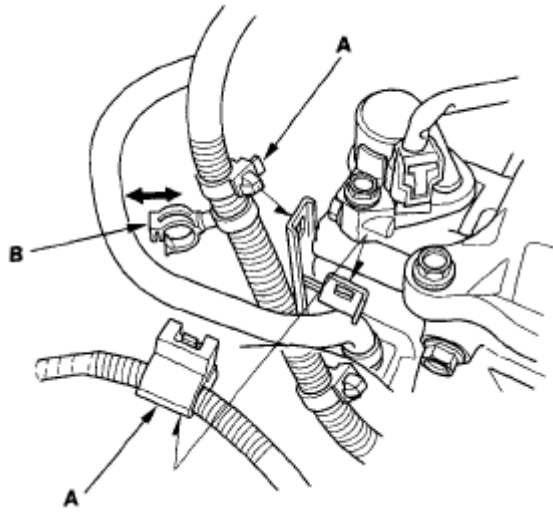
Identifying Positive Crankcase Ventilation Hose Clamp
